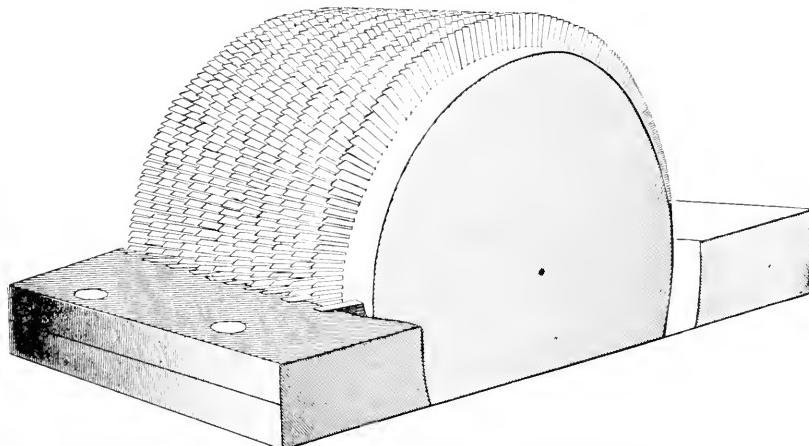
SHOWS THE ARRANGEMENT OF MOVING BLADES AND GUIDE VANES IN A PARSONS'S TURBINE. The top outer cover has been removed. The cylinder containing the revolving barrel has, as will be seen, a greater internal diameter than the diameter of the drum. It is the annular space thus formed through which the steam flows and which contains the revolving blades and the fixed guide blades. Between each two rings of moving blades there is a ring of guide blades, the latter being keyed into the containing case. The vanes are set at an angle, so that the steam acts on them as wind on the sails of a windmill.
